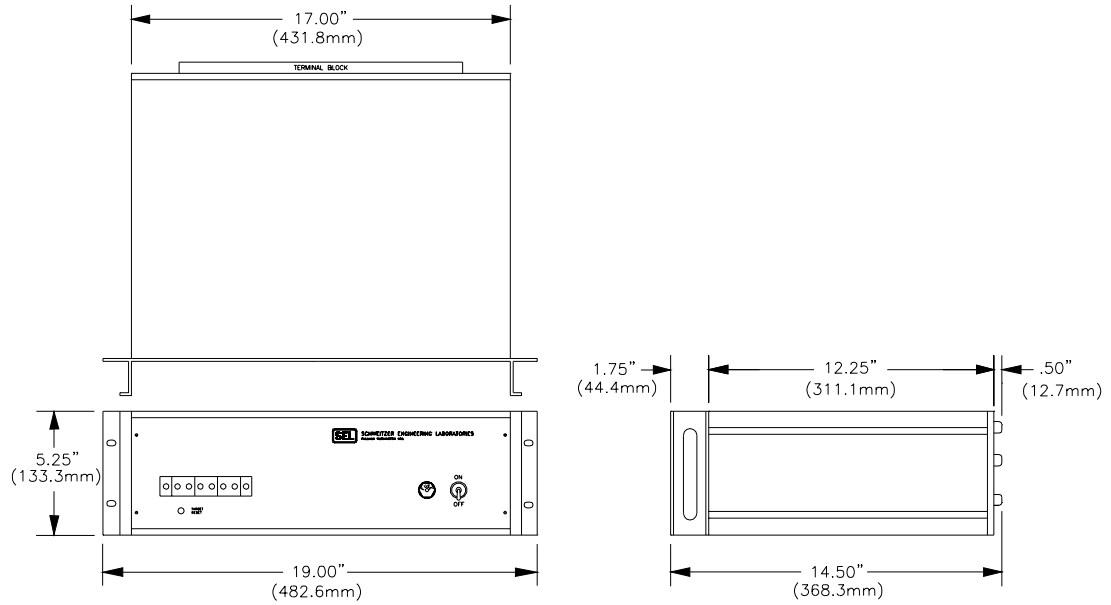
Horizontal Front- and Rear-Panel Drawings
